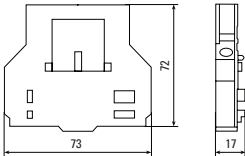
Overall dimensions of auxiliary side contacts KB
